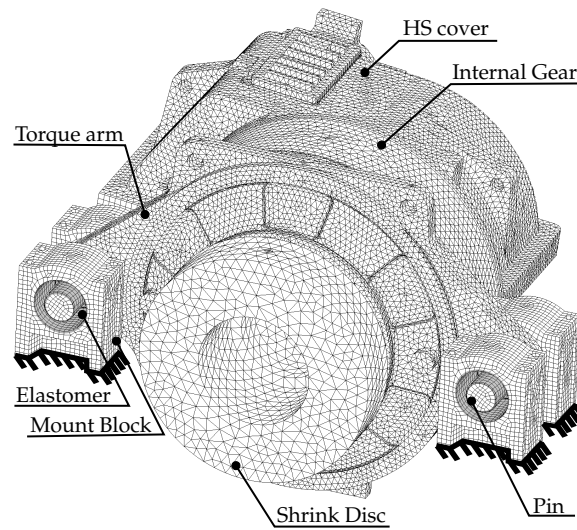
Overview on the finite element model of the gearbox housing and supporting components.
